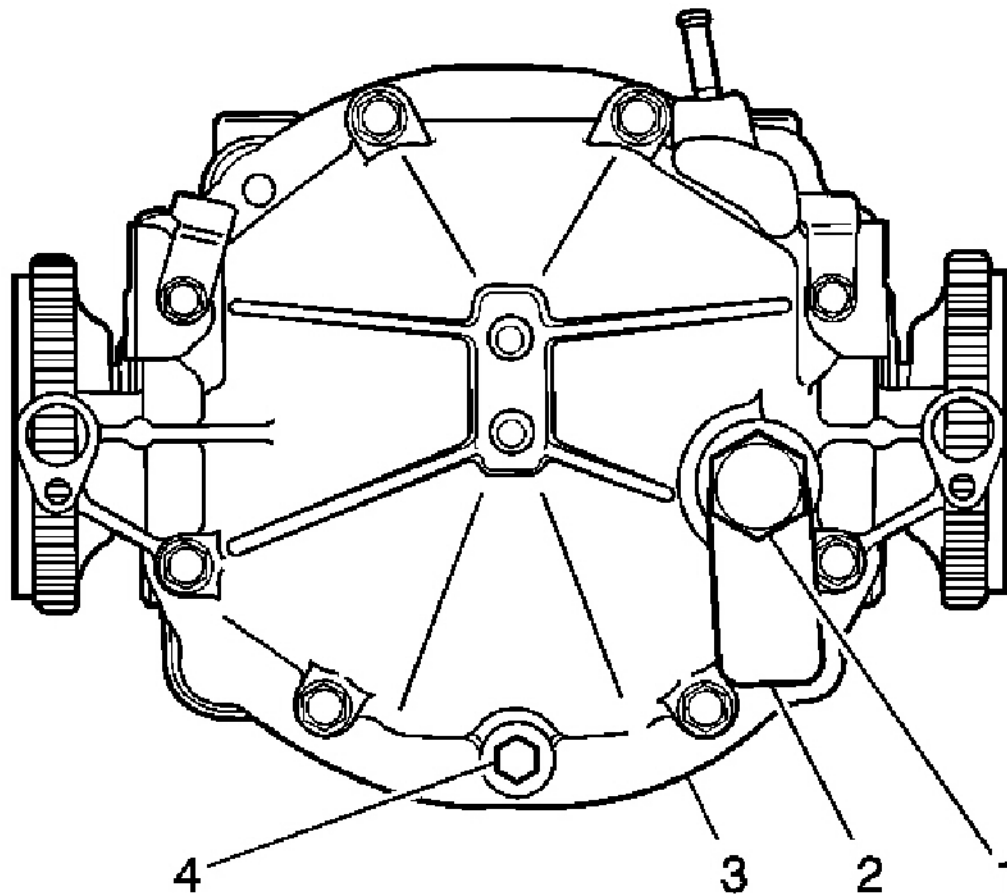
View Of Oil Level Fill Plug & Drain Plug
